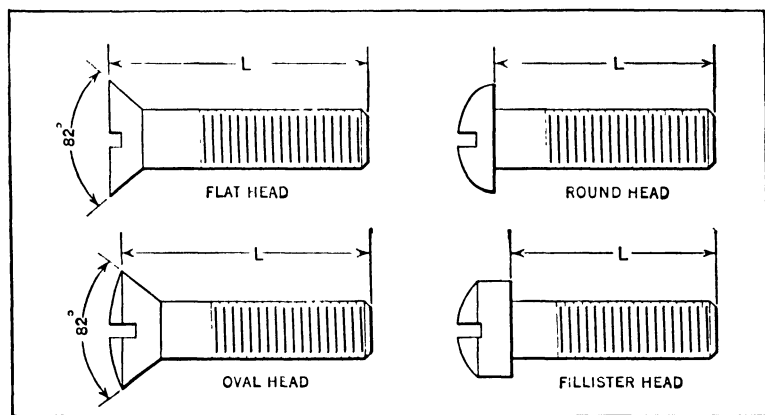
Different Classes of Machine Screws Included in the American Standard
